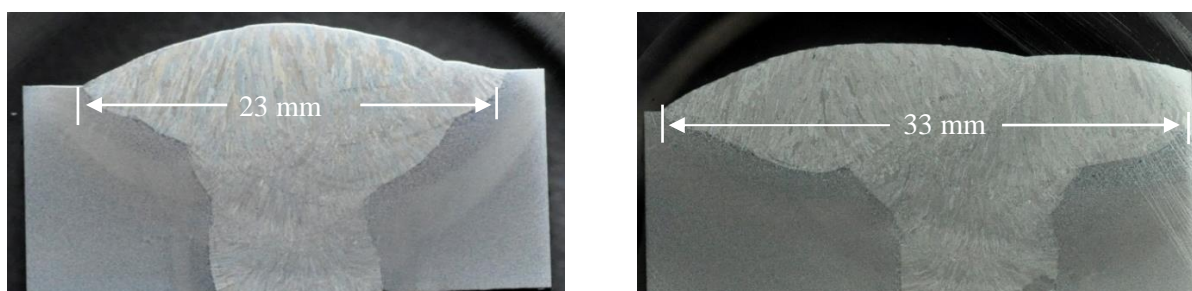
Macrograph of the welded joint, LI (left) and HI (right)
